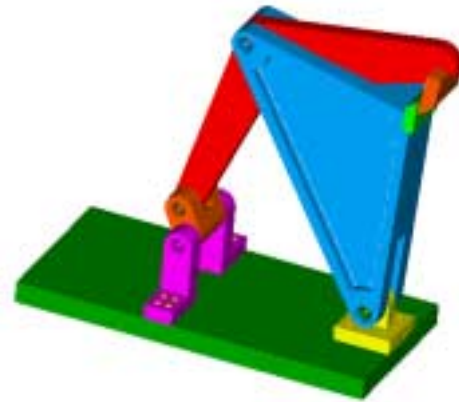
Cutter Mechanism Designed in Kinematics/Dynamics of Machines Course
